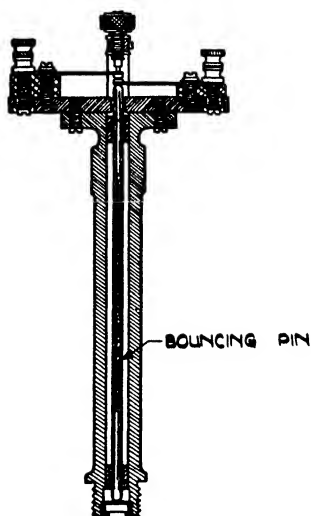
THE BOUNCING PIN MECHANISM OF C.F.R. ENGINE.
